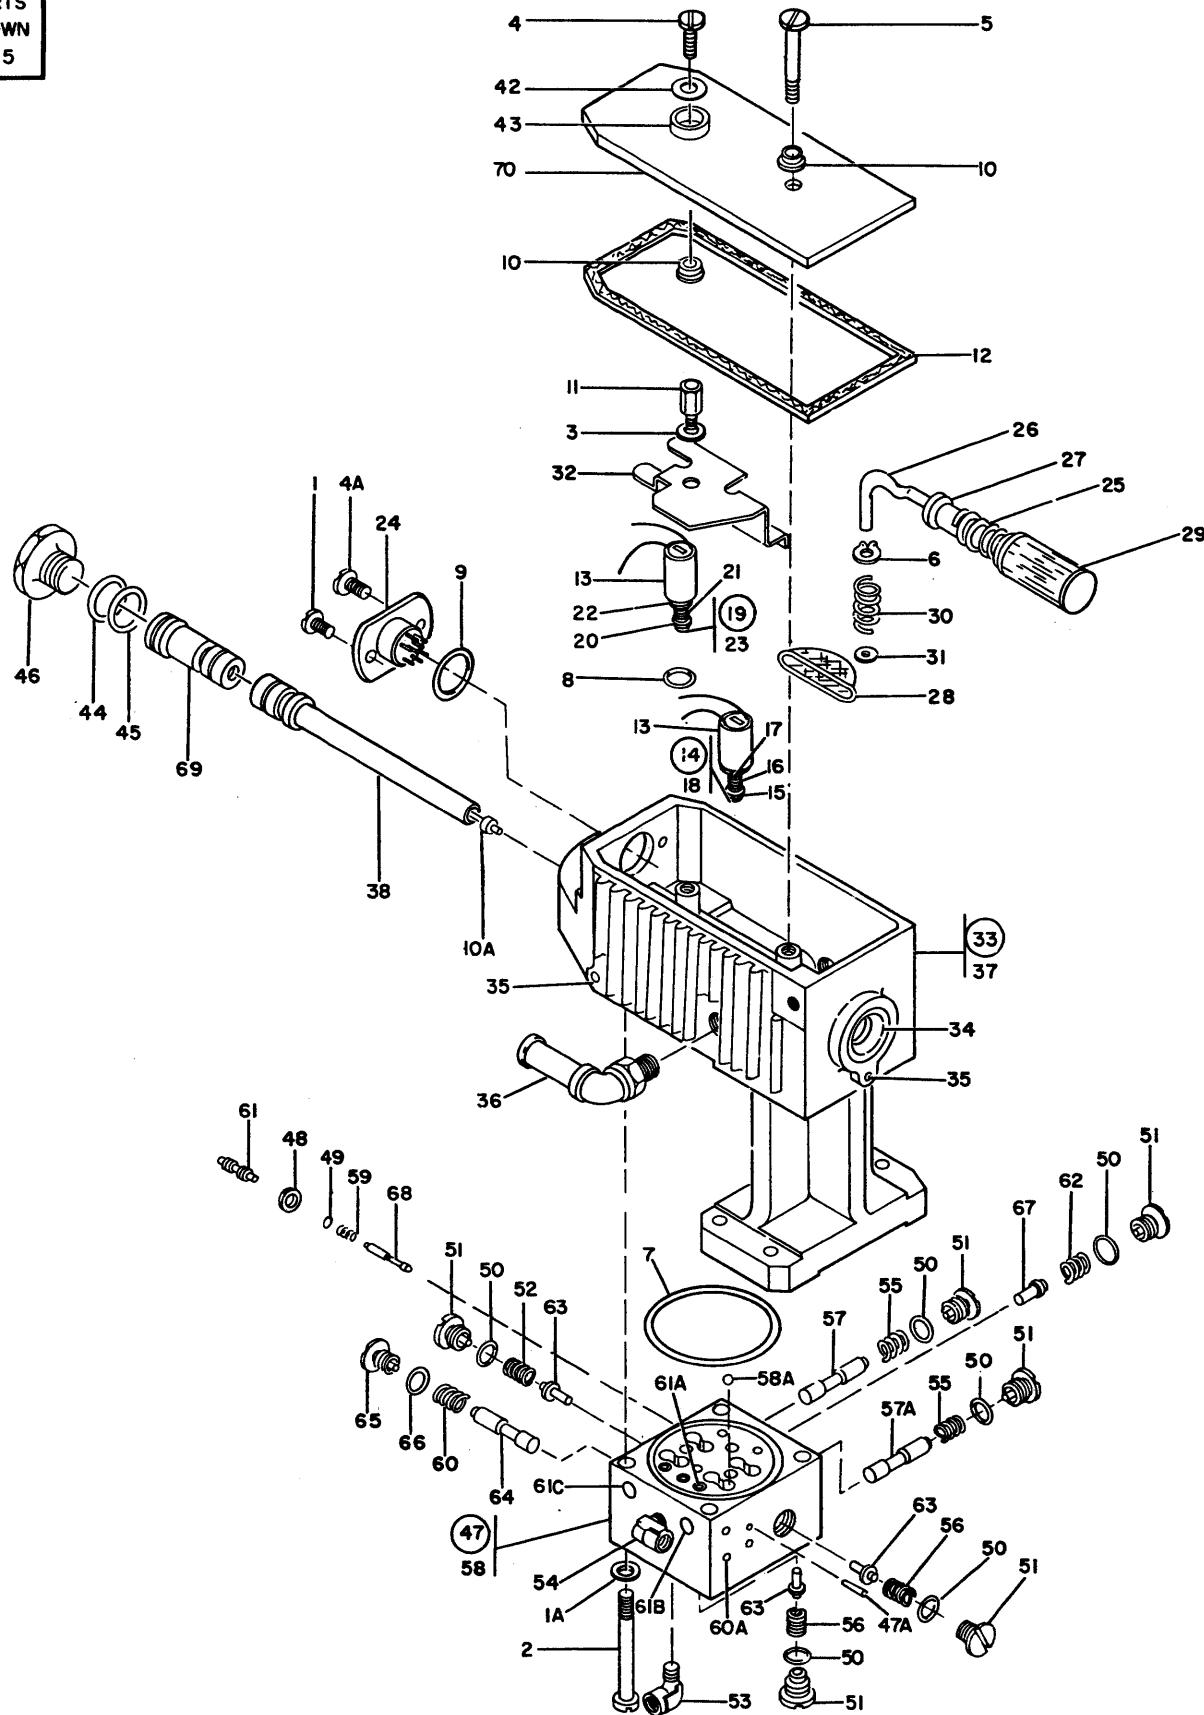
HYDRAULIC ACTUATOR ASSEMBLY. SEE LIST 6.
